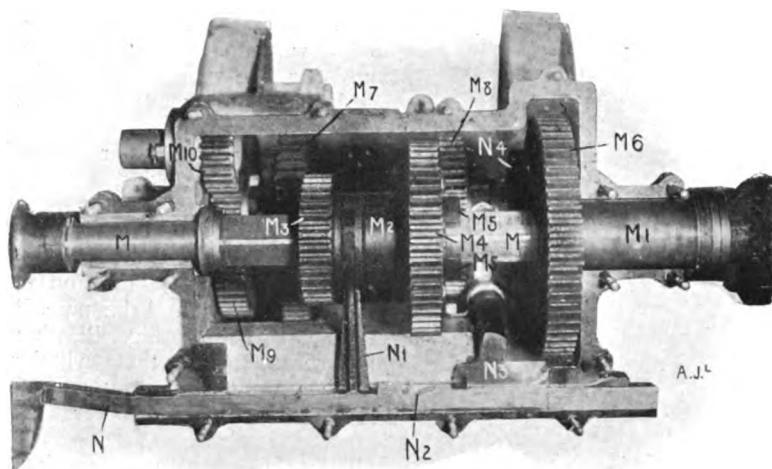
The Belsize Change-Speed-Gear. View from the underside of the Gear-Box, with the base casting removed.
